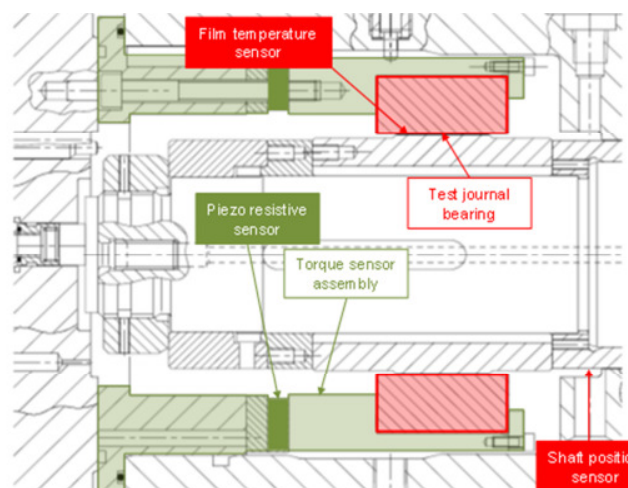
Cross sectional view of the journal bearing test rig, indicating the position of the various sensors.
